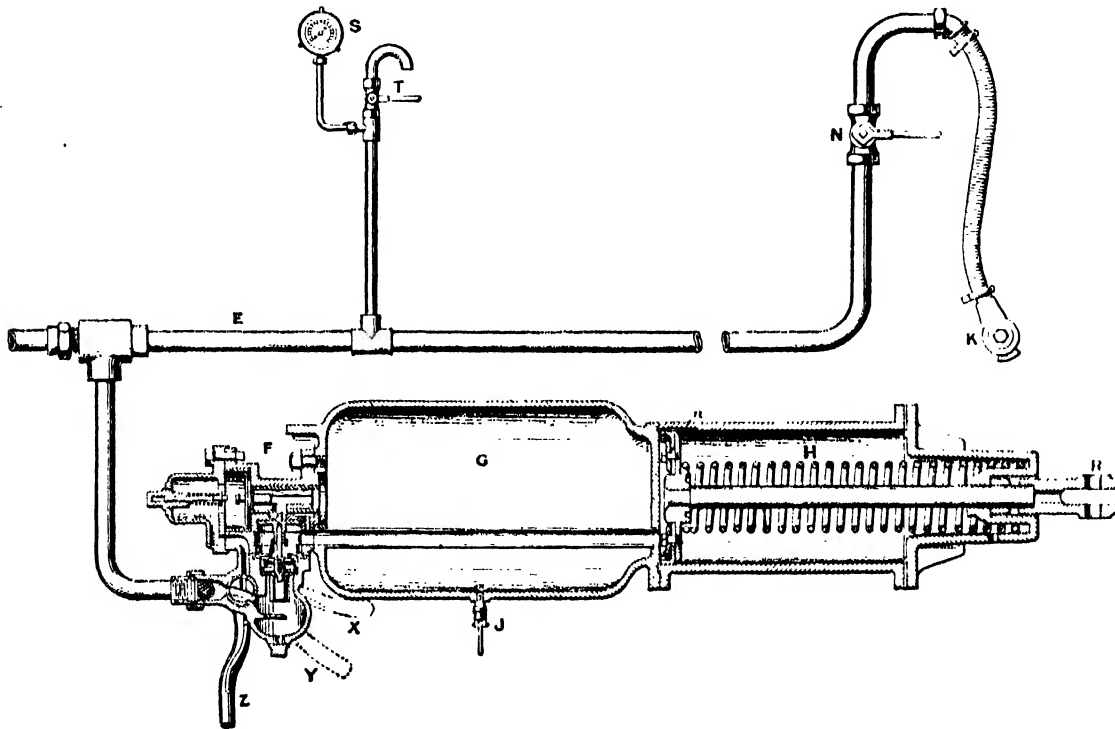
Westinghouse Quick-acting Compressed-air Brake
